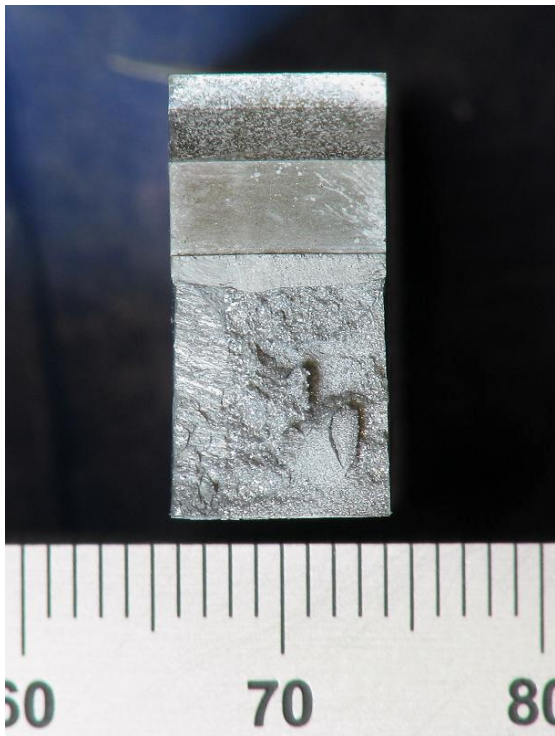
Fracture Surface of Tests with lateral compression.
